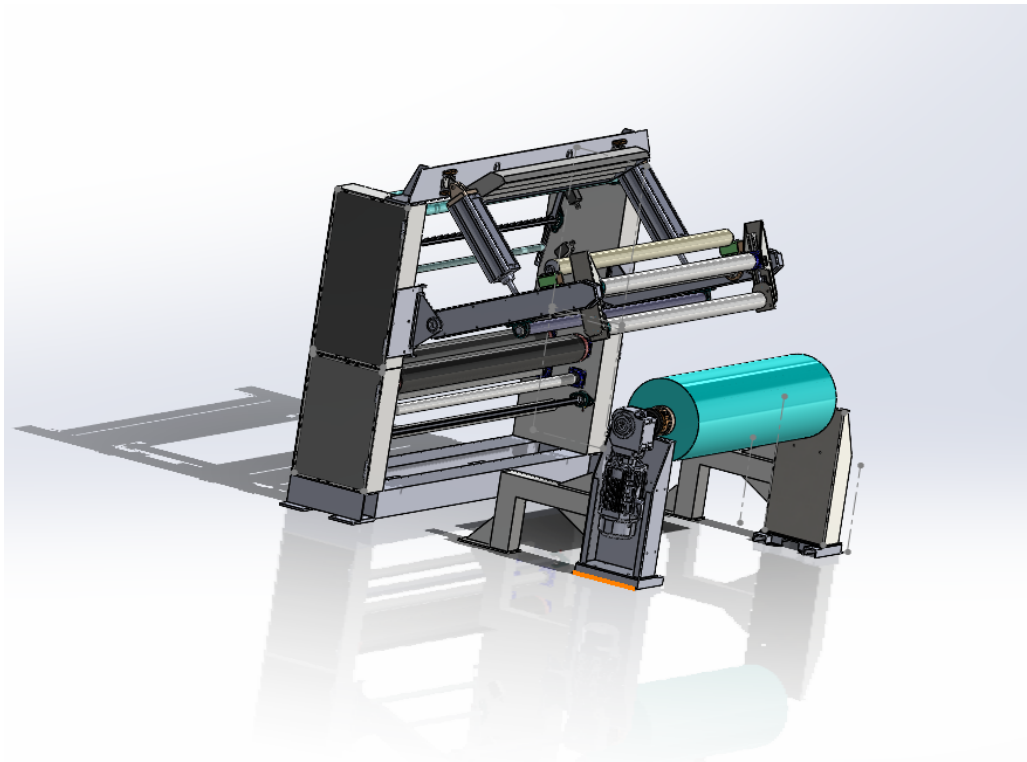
Rewinding Unit – Output Roll and Take-up Drive
